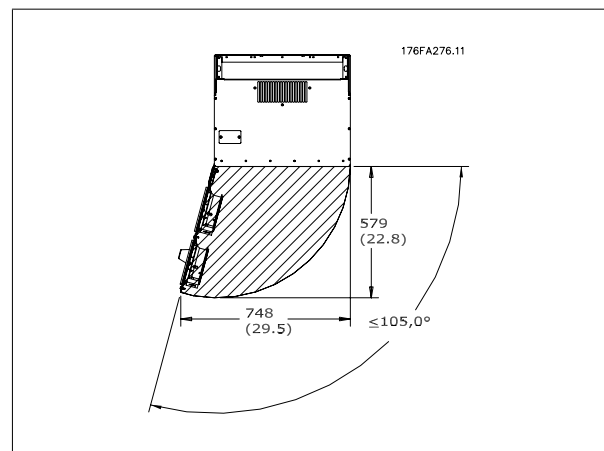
Space in front of IP21/Nema 1 and IP54/Nema drive types for unit size 51.
